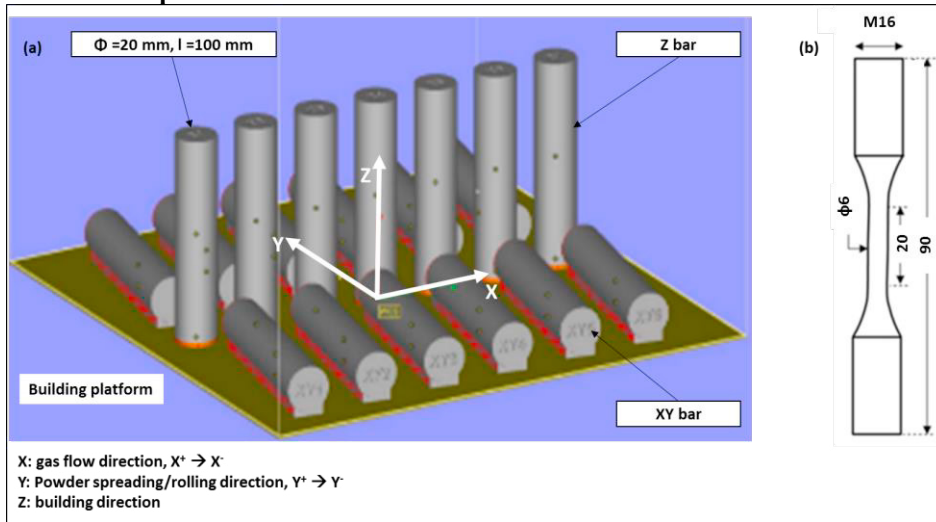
(a) Position and orientation of bar, (b) machined fatigue test specimen
